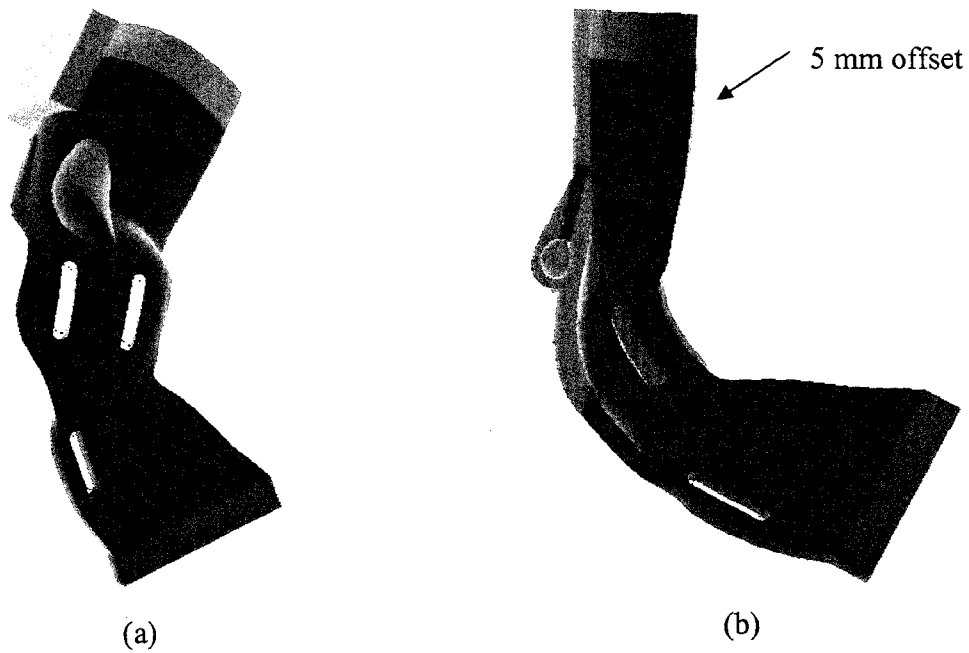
AFO having integrated arrangement for fixing single spherical ball & socket joint (a) back view (b) sectional side view
